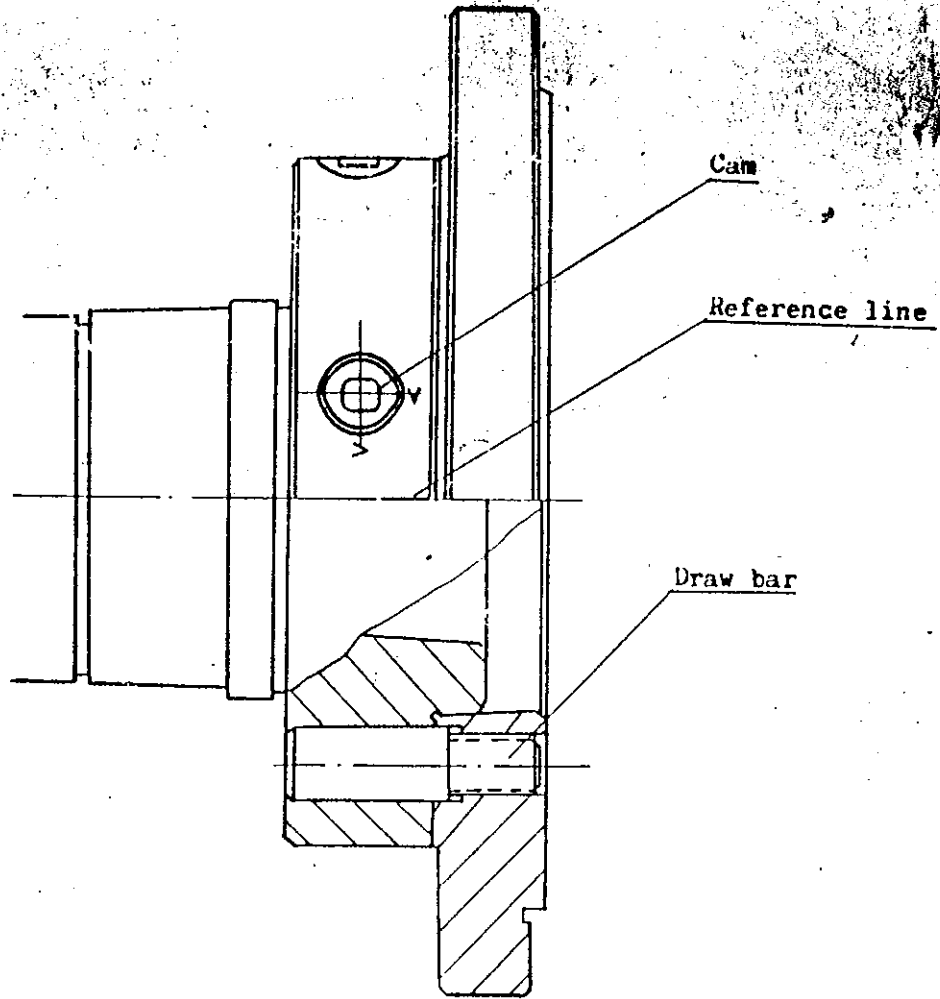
Assembly diagram for fitting chuck driving plate or face plate on spindle nose
